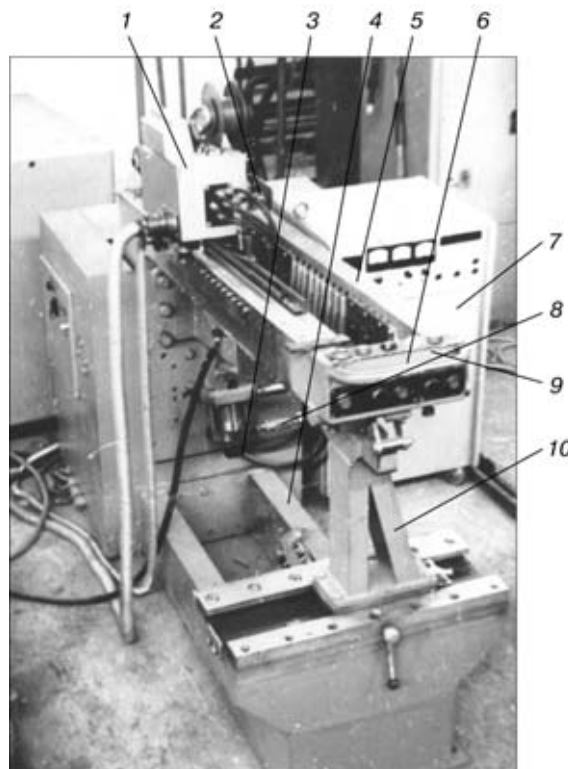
A-1578 machine for making longitudinal butt welds of box-shaped elements (for designations see the text)
